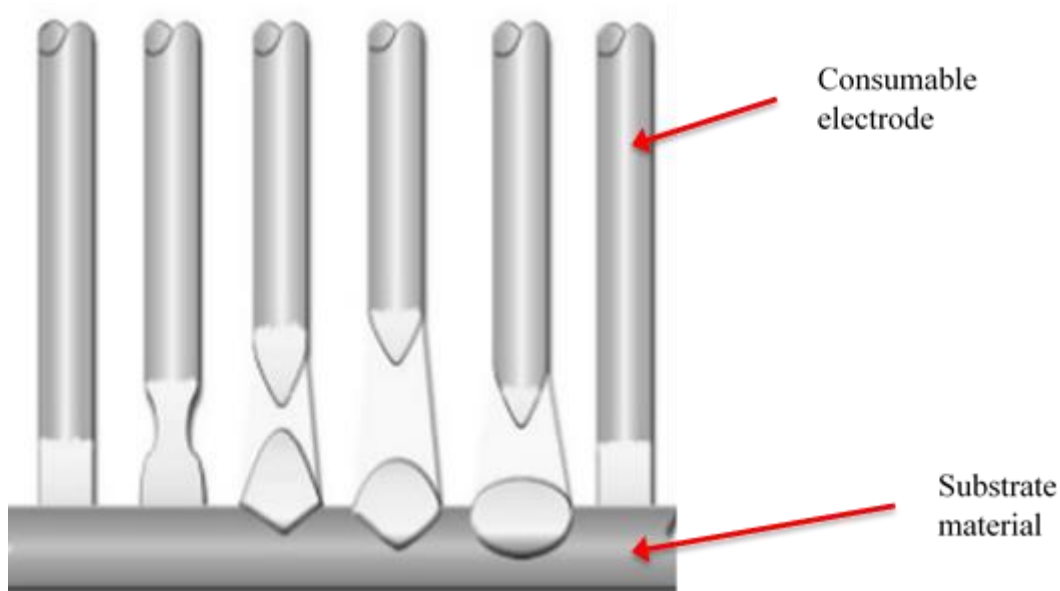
A representation of the MIG welding process. The process of the electrode necking as it heats up before forming a molten weld pool on the substrate material is shown sequentially from left to right.⁹
